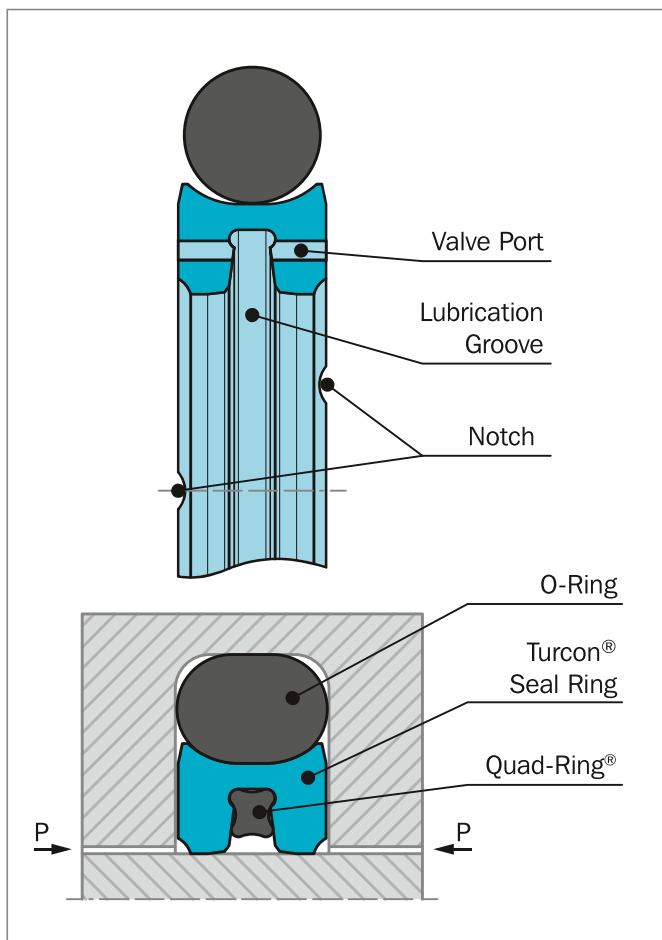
Turcon® Roto Glyd Ring® V with pressure relief
